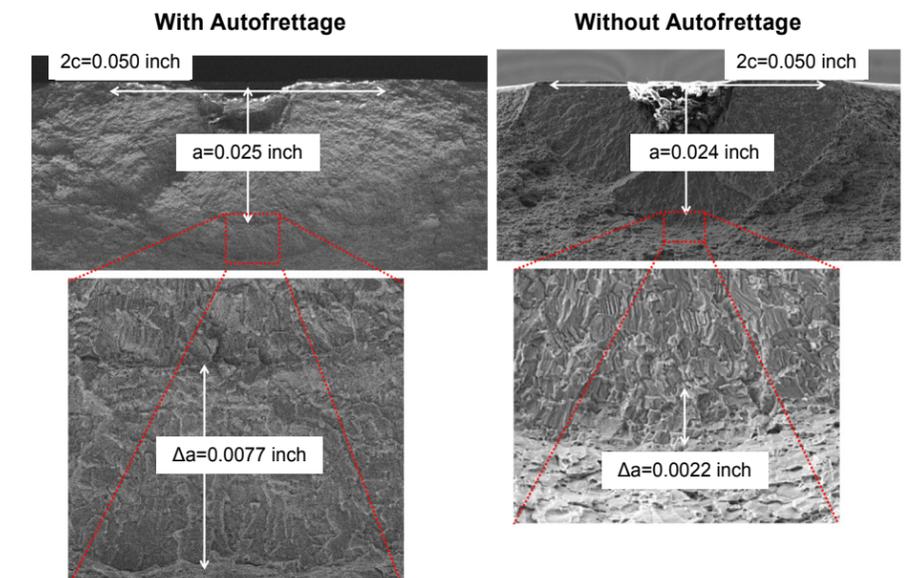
Fracture surfaces from two identical tests showing crack growth (Δa), with and without an initial autofrettage cycle.
